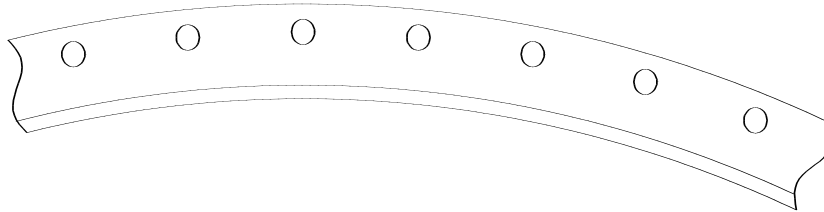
View B of the Bolt Holes for the Forward Flange
